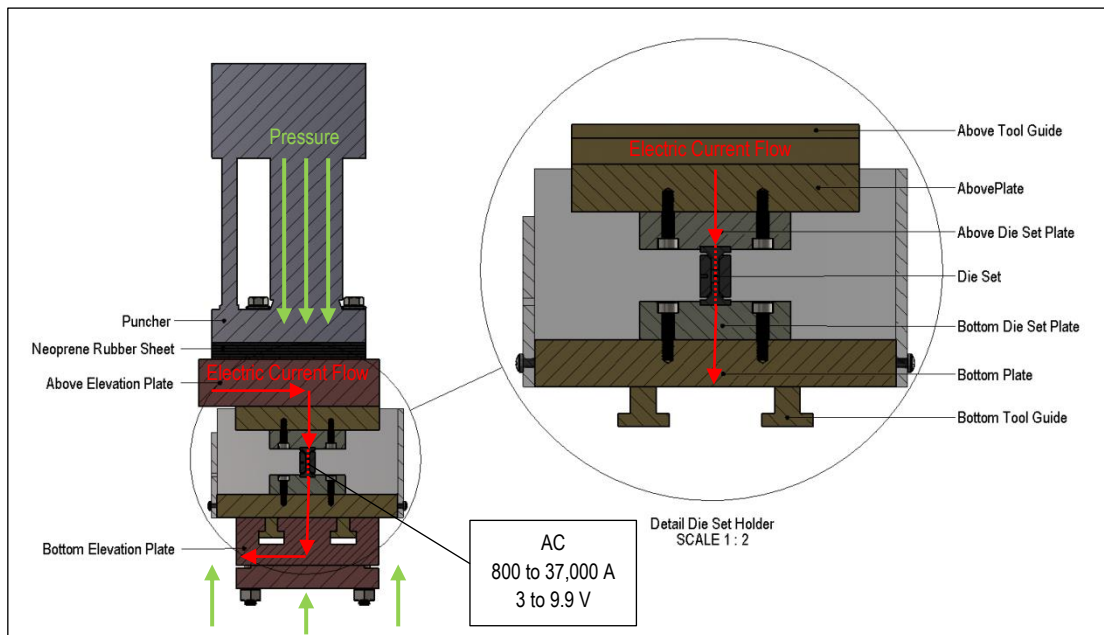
Schematic drawing of the Projection Welding machine tooling and current flows (red arrows) during the open-air electrical-field activated sintering and forming process.
